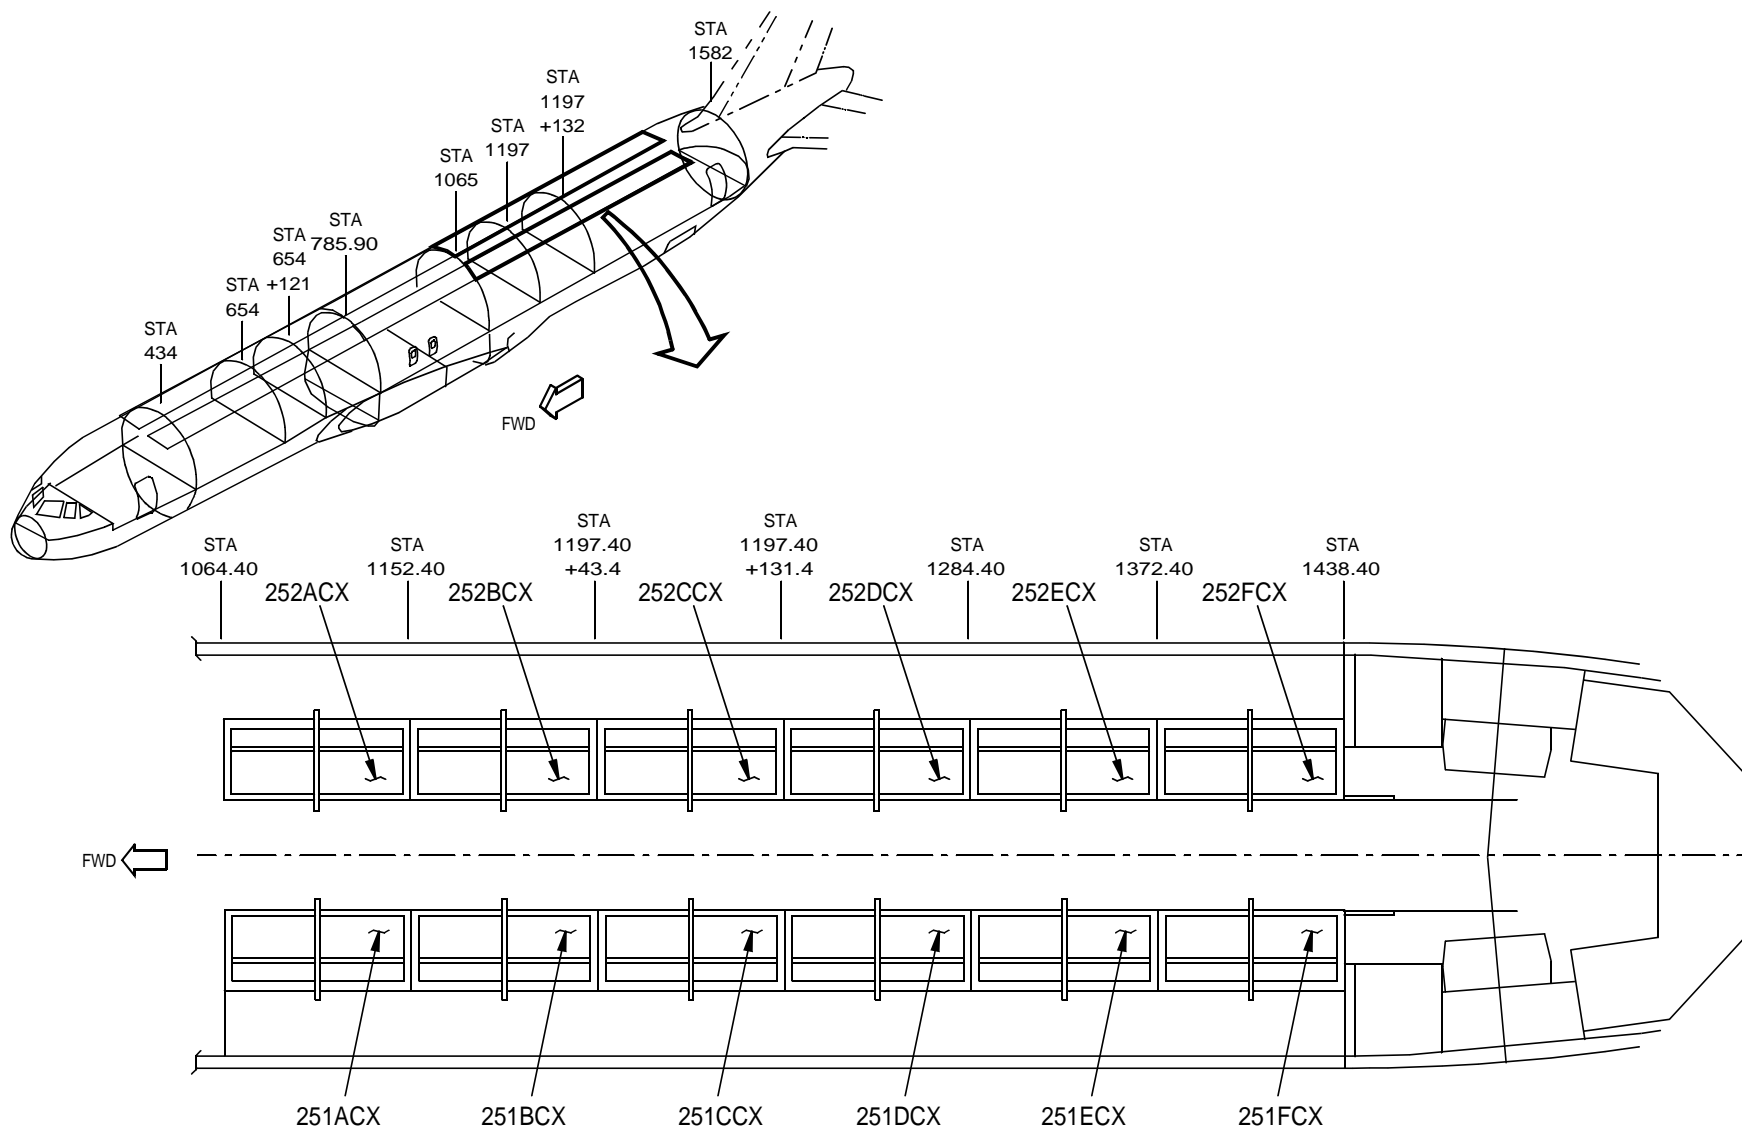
SUB-MAJOR ZONE 251/252 PASSENGER CABIN CEILING PANELS (-300 ONLY)
